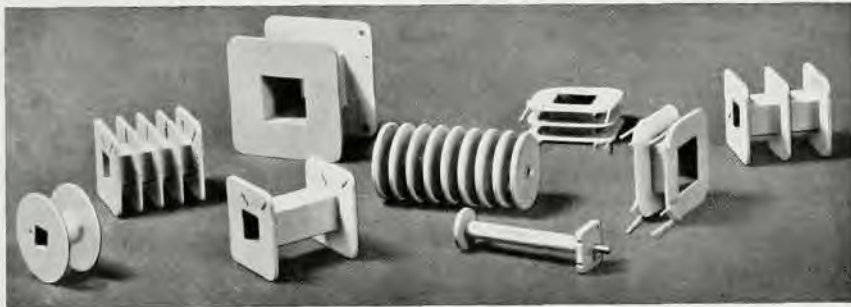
Typical Completely Moulded Plastics Formers used on Tropical Equipment
